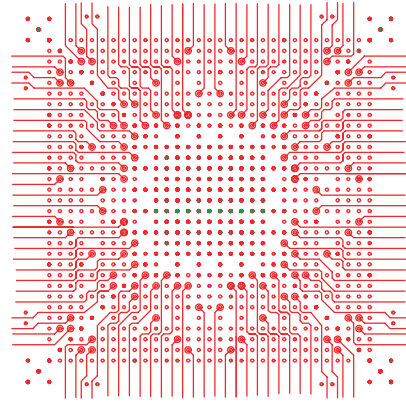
XCV1600E - FG900 NSMD Solder Land Pad Layout
